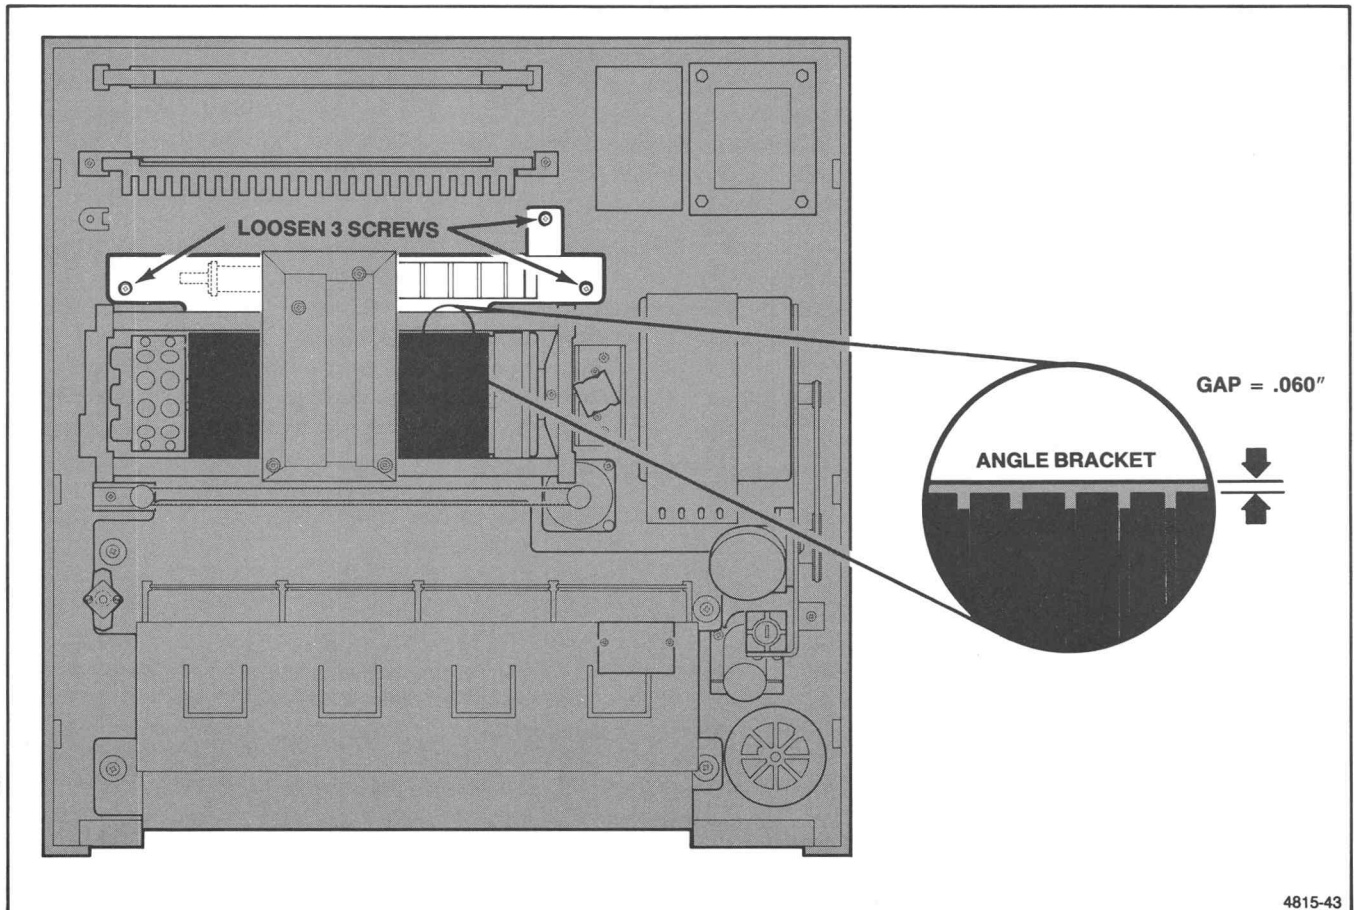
Angle Bracket to Drum Position Adjustment.
